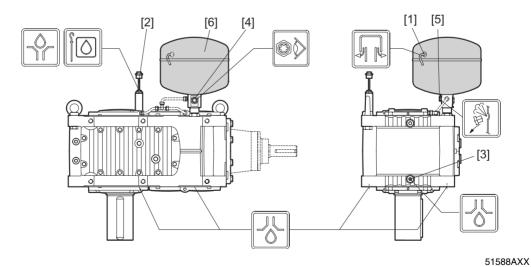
MC.PV../MC.RV.. industrial gear units with steel oil expansion tank
